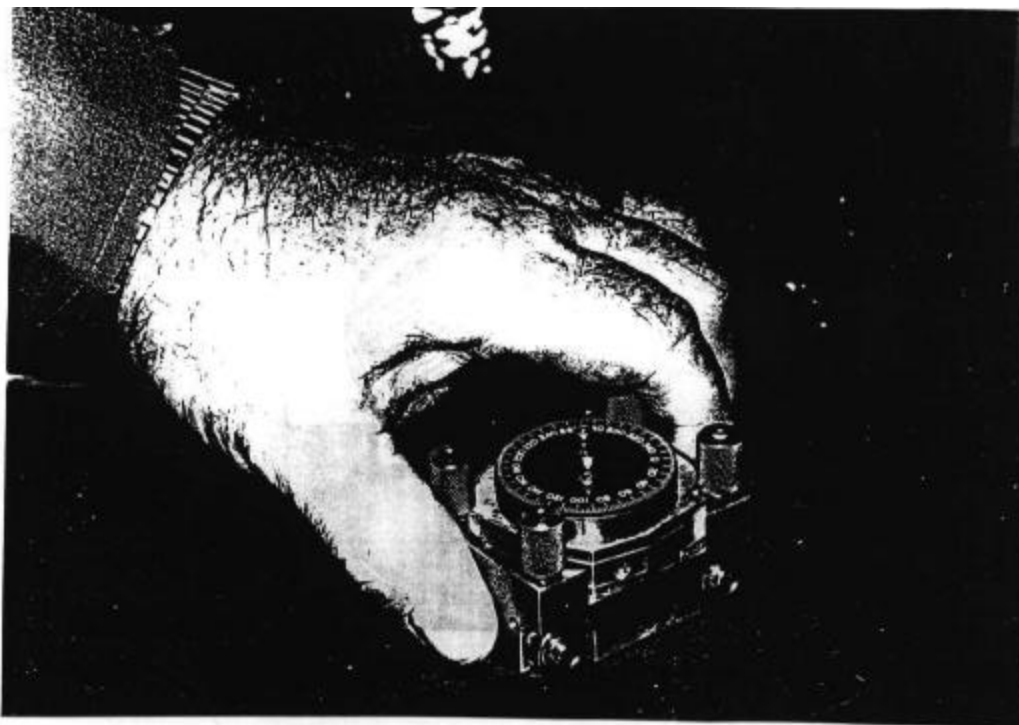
Diffraction Sensor for Surface Testing of Welds
